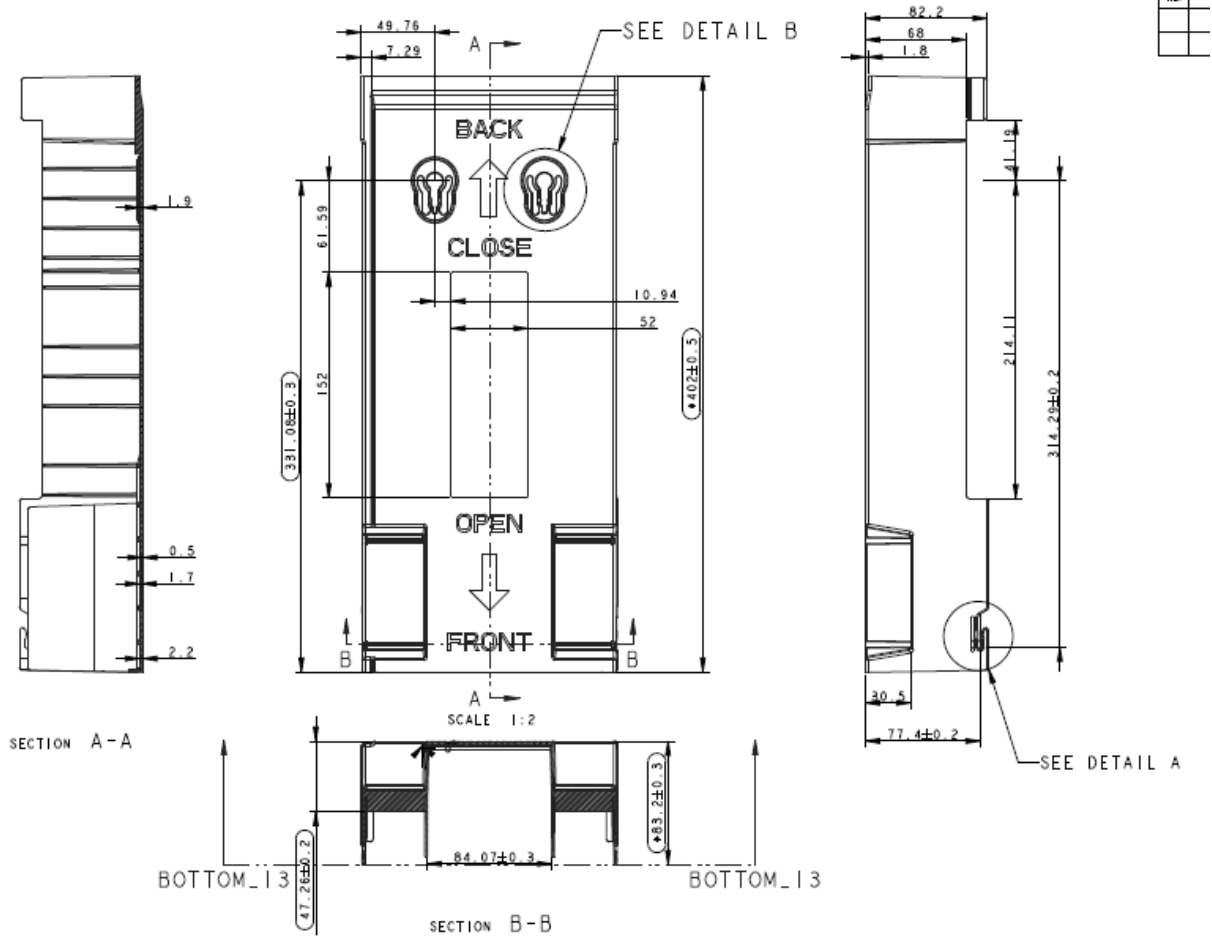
MiTAC E8020 Capri Dimension (B Detail)
